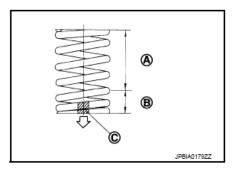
Identifying Wide And Narrow Pitch Of Valve Spring Courtesy of NISSAN NORTH AMERICA, INC.
